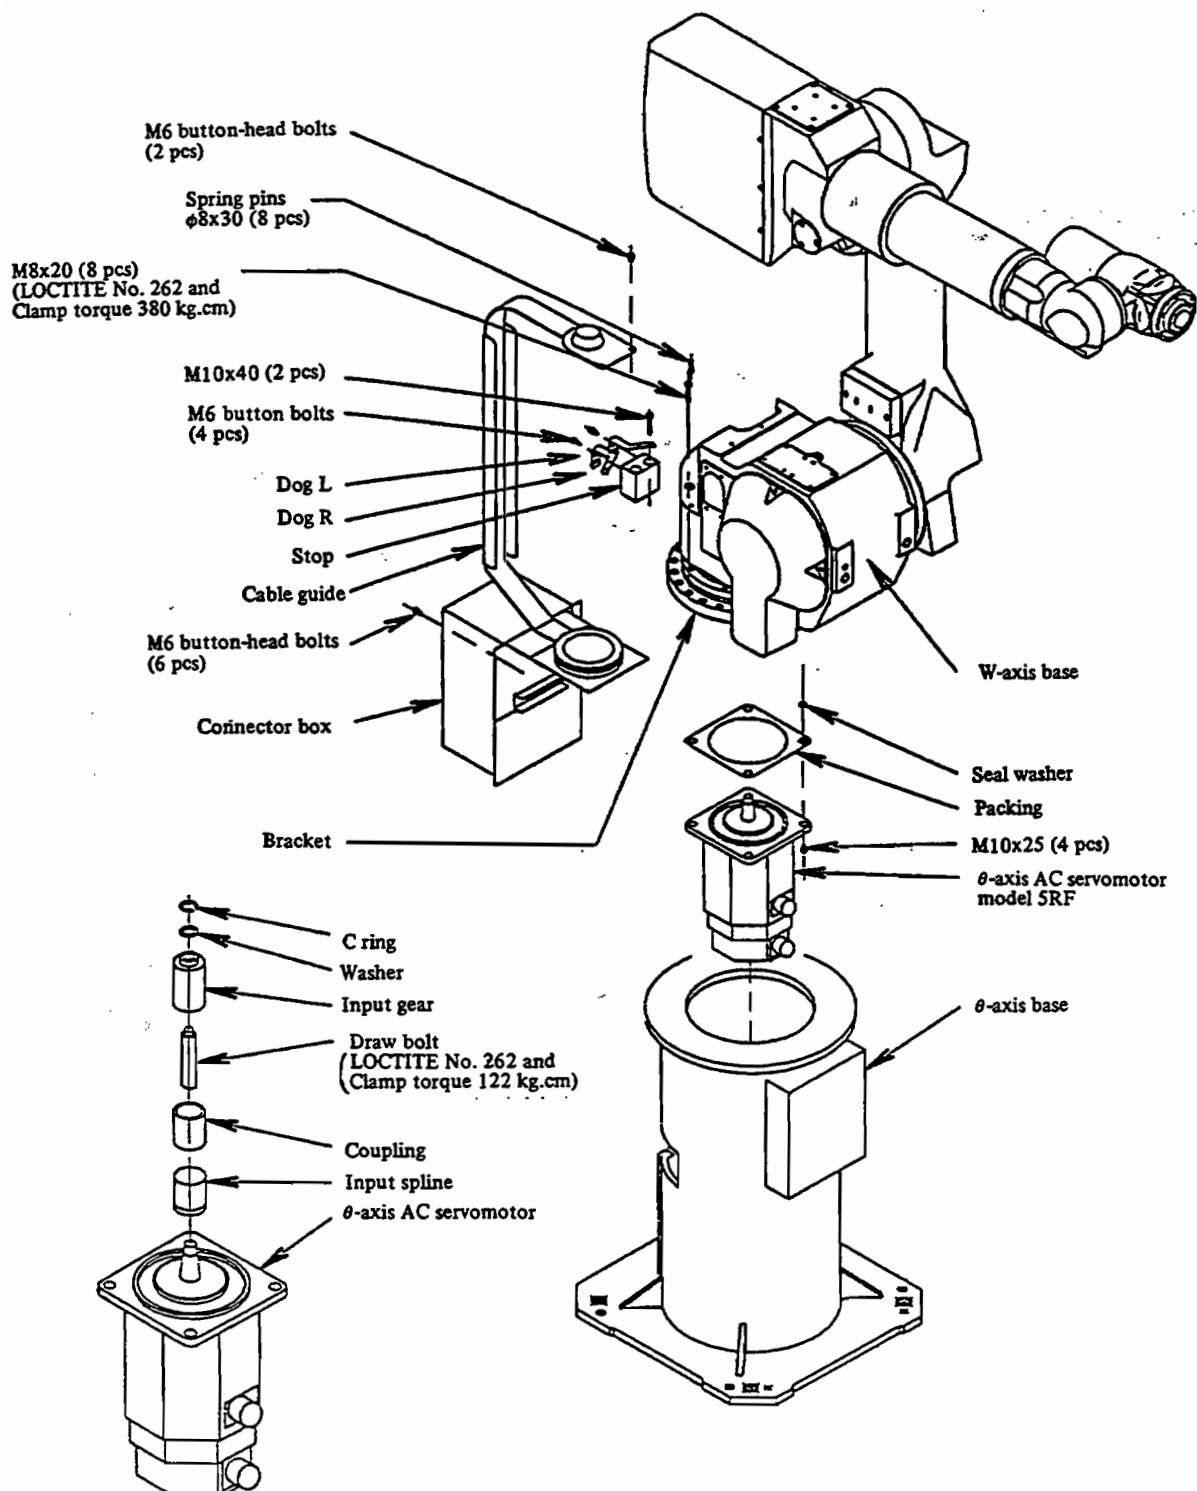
(a) Replacing θ -axis motor (S-10)
